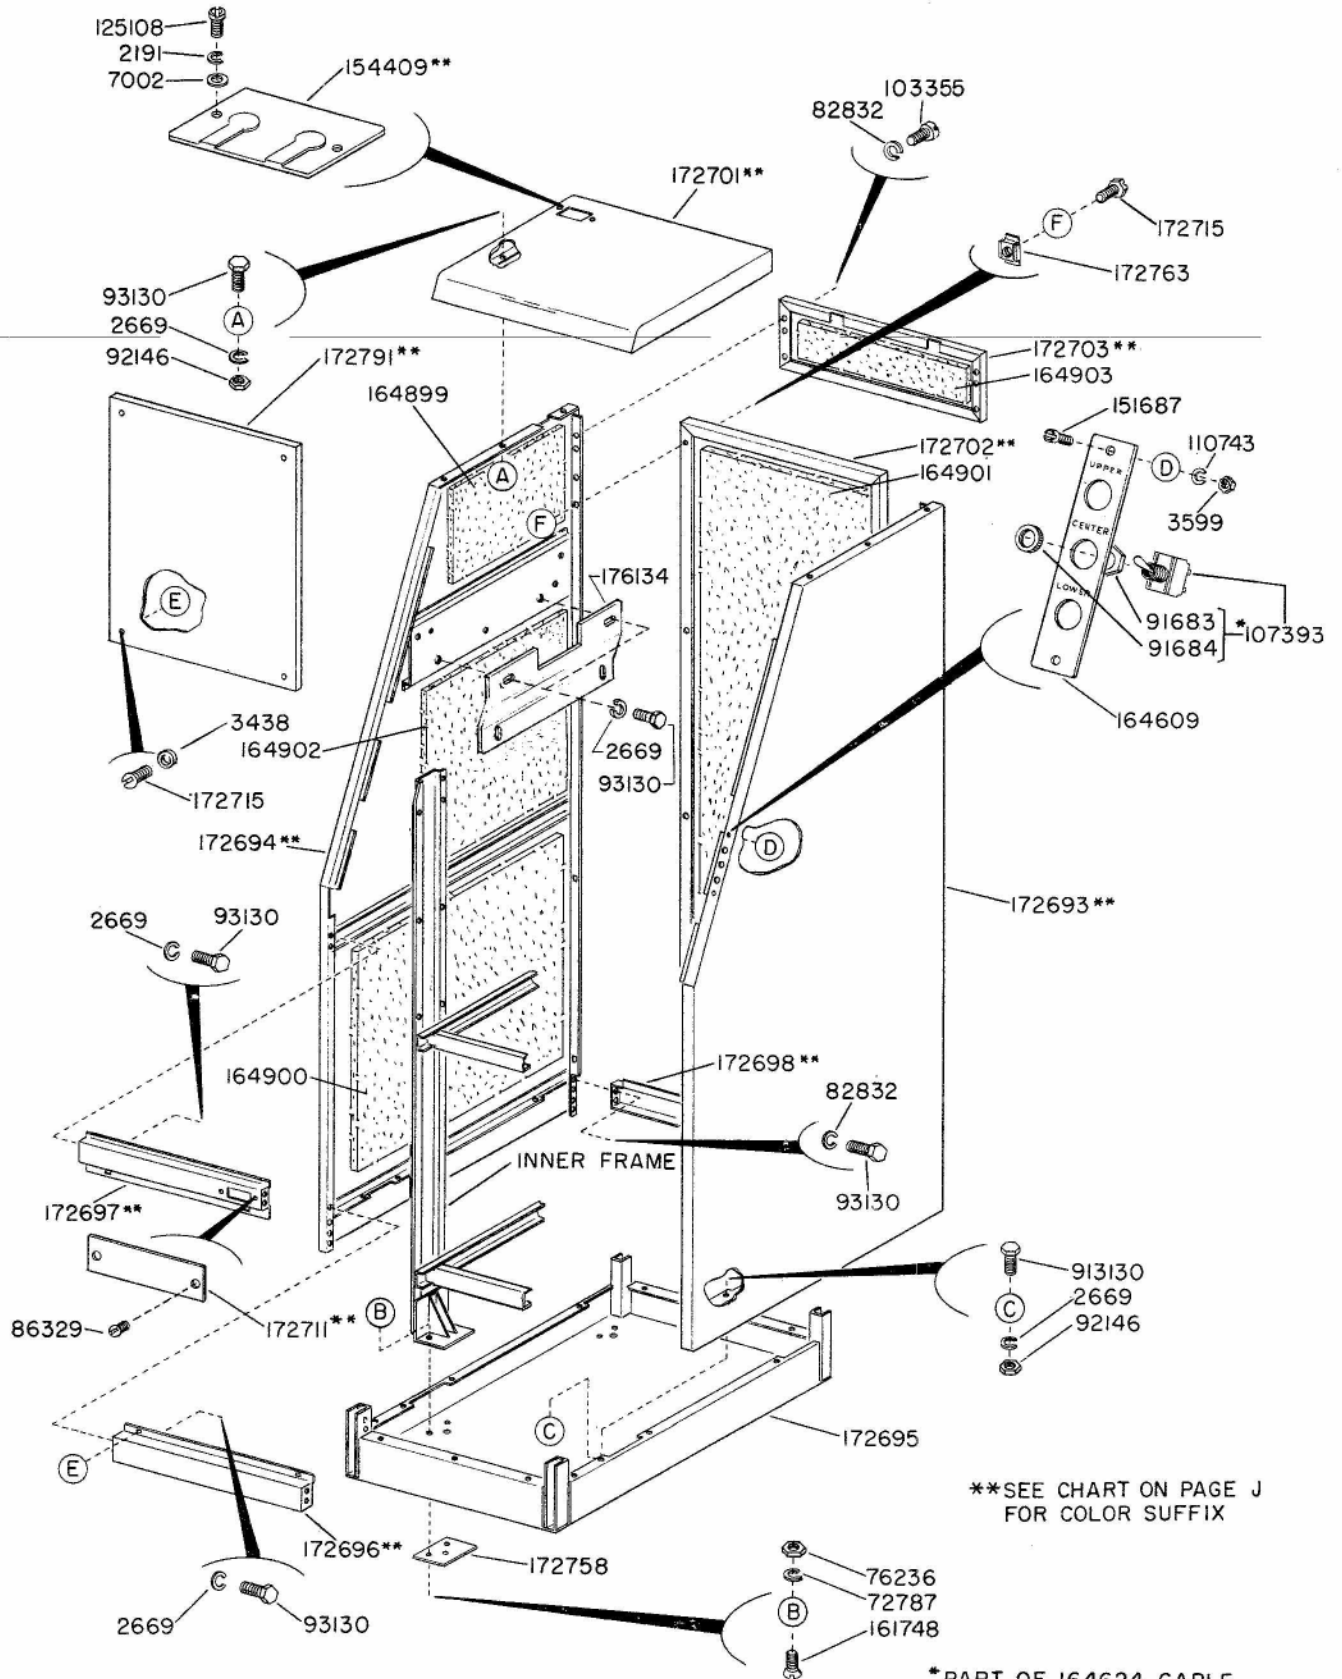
CABINET BODY ASSEMBLY (LBAC211)
